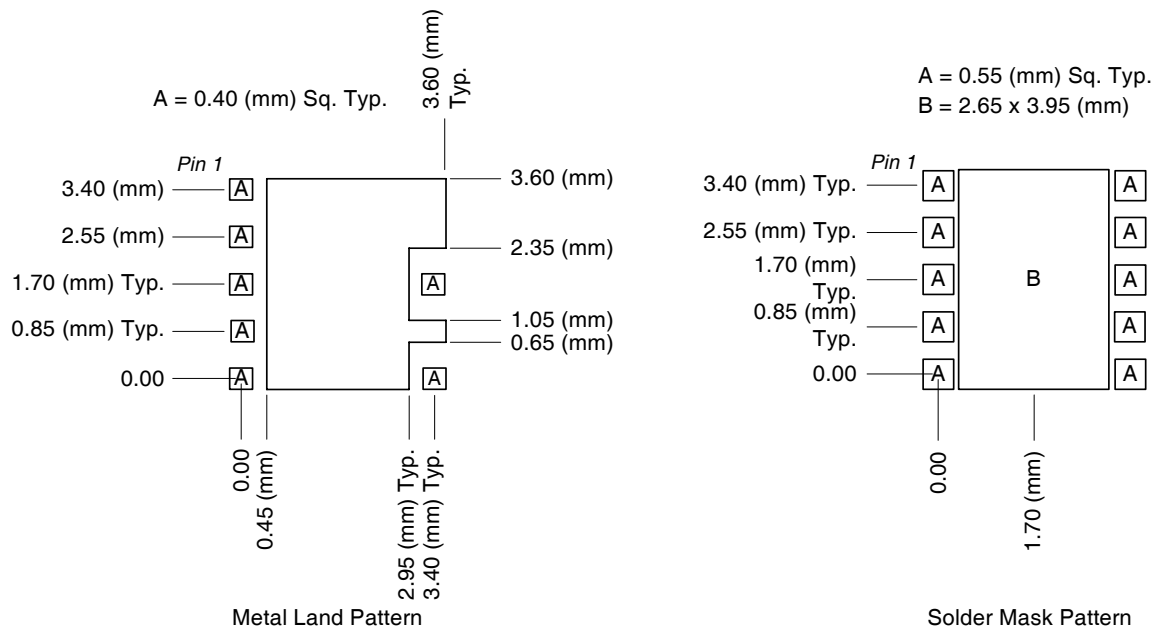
PCB Metal Land and Solder Mask Pattern (Top View)
